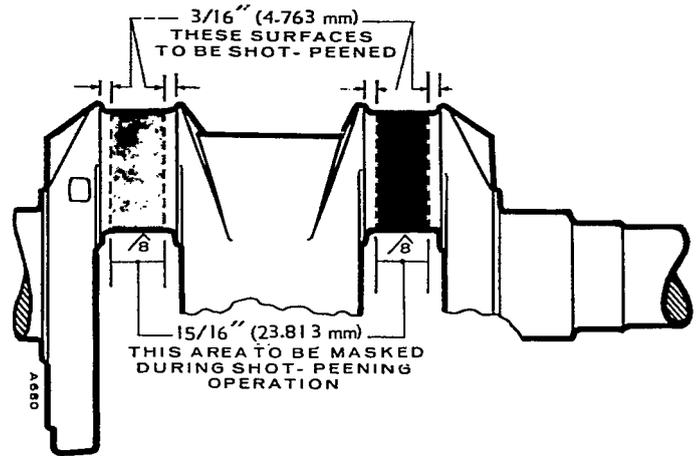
SHOT-PEENING THE CRANKSHAFT
